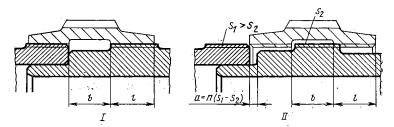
Connecting tubular parts with differential-thread nut *I*—after assembly; *II*—before assembly
